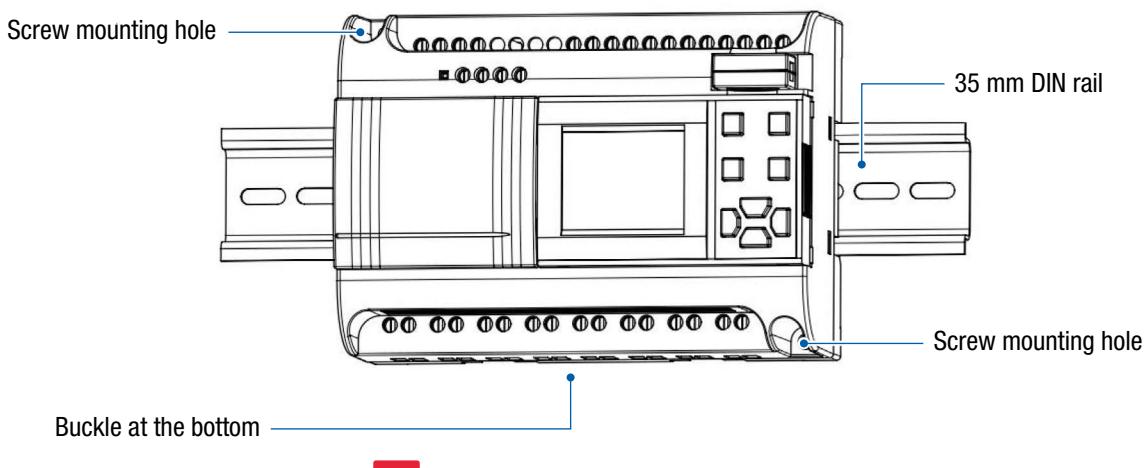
Use stand and DIN rail for installation of BoxX 2
